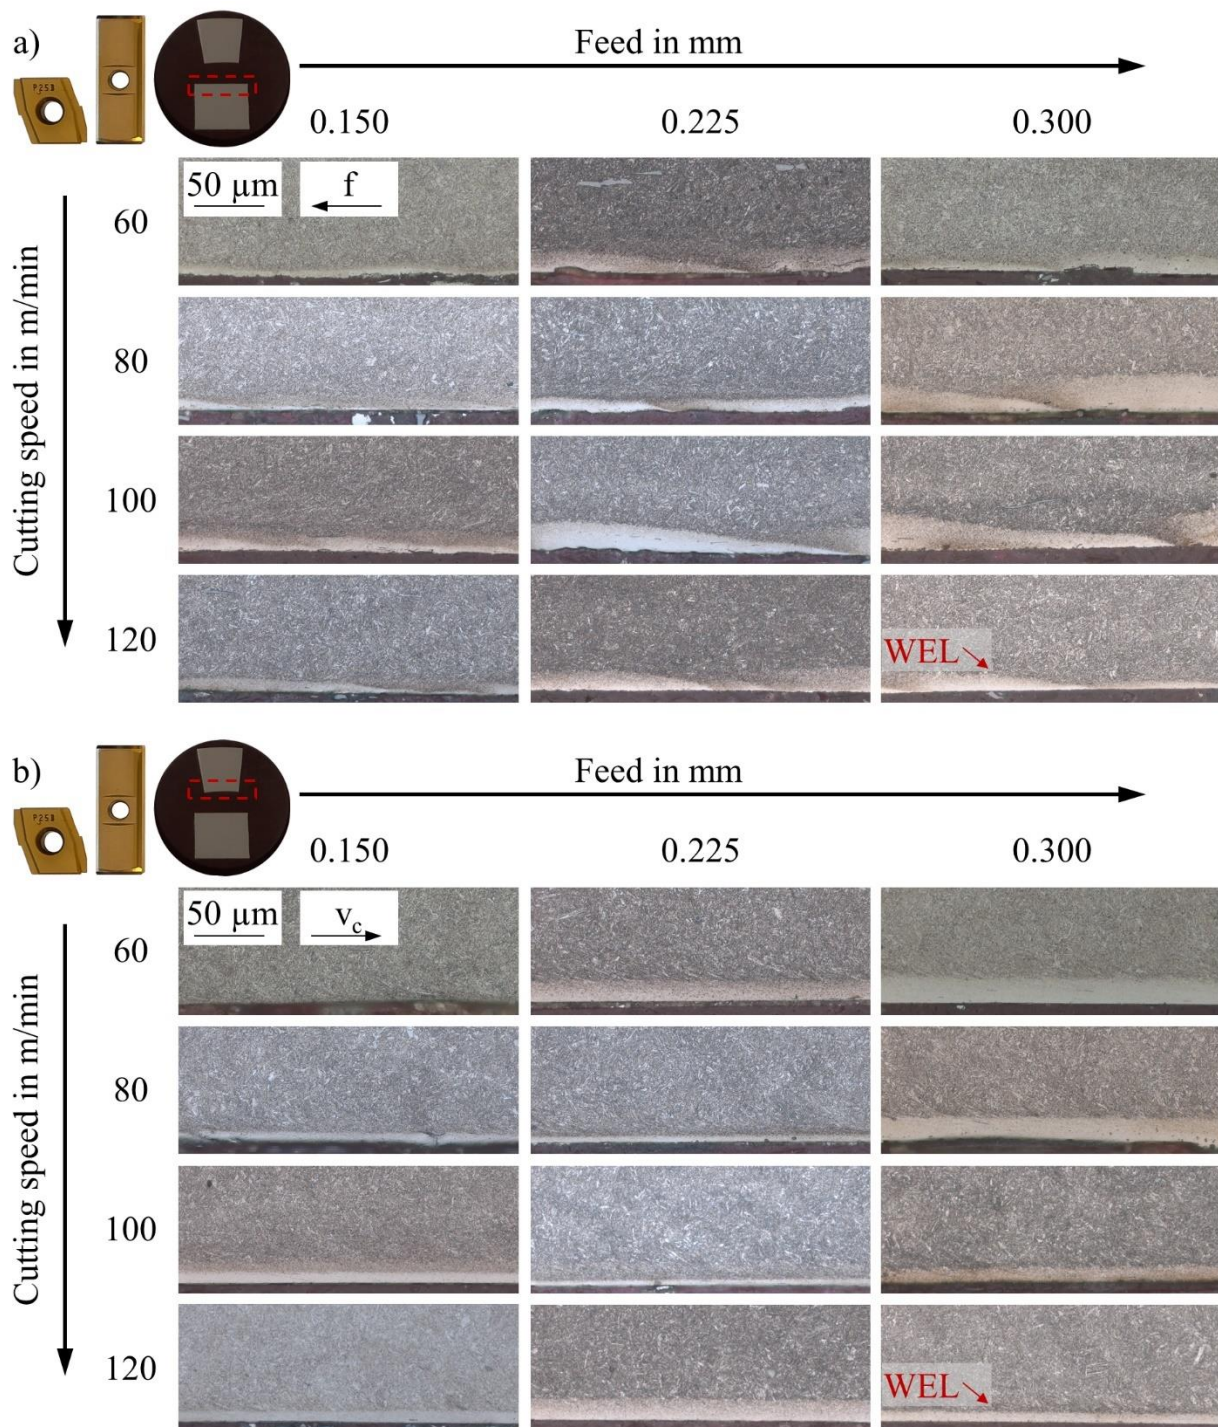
Micrographs of the surfaces of the bores machined with TiN-coated cutting edges and guide pads: a) longitudinal sections, b) transverse sections
